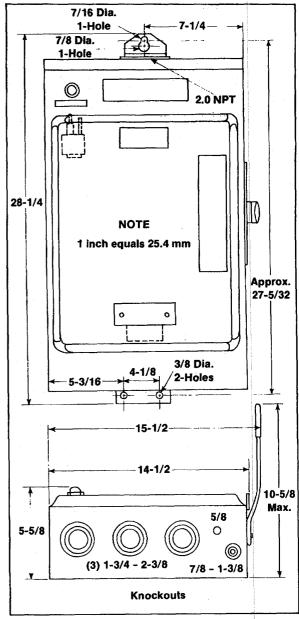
200/100 Amp. Transfer Switch Mounting and Overall Dimensions
